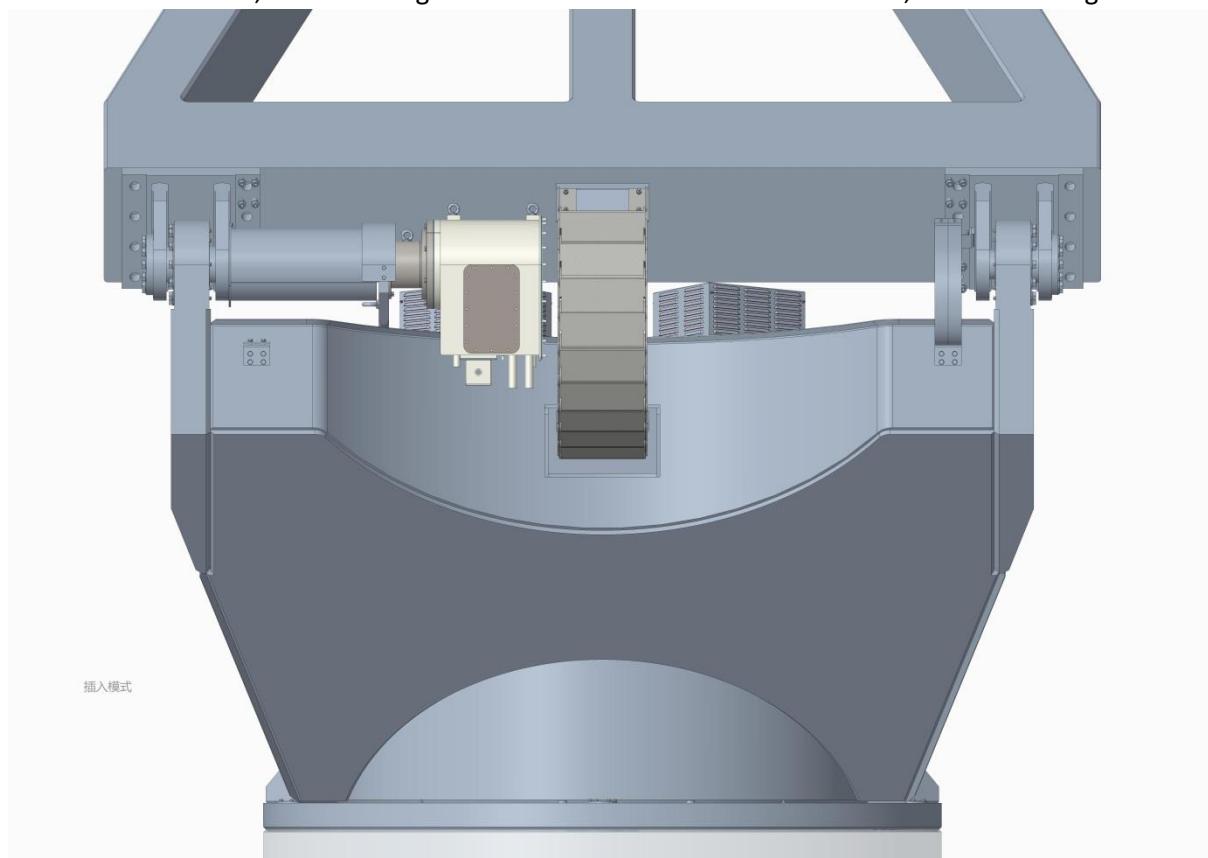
Elevation I/O Unit Mounted on the Turnhead
